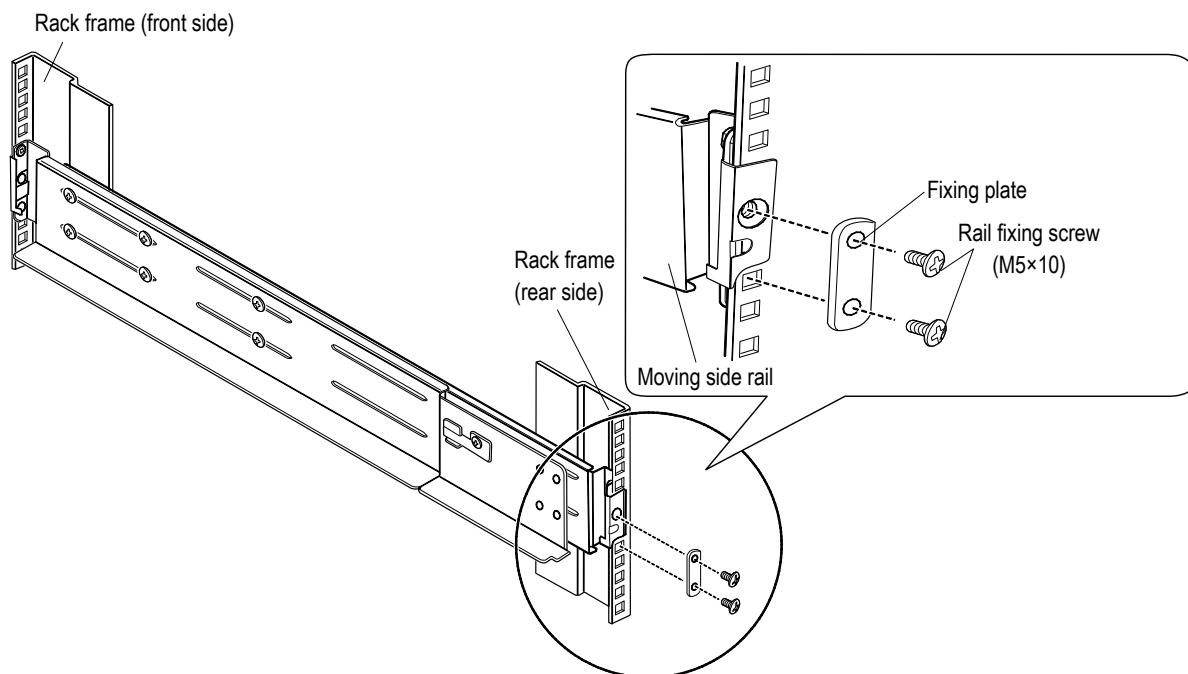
Installing Rack Rails (Square Hole) for Drive Box (2U)-3
